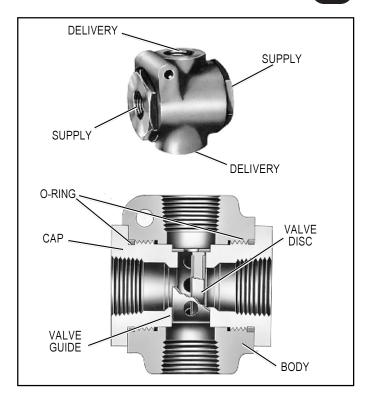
DOUBLE CHECK VALVE (DISC TYPE)
